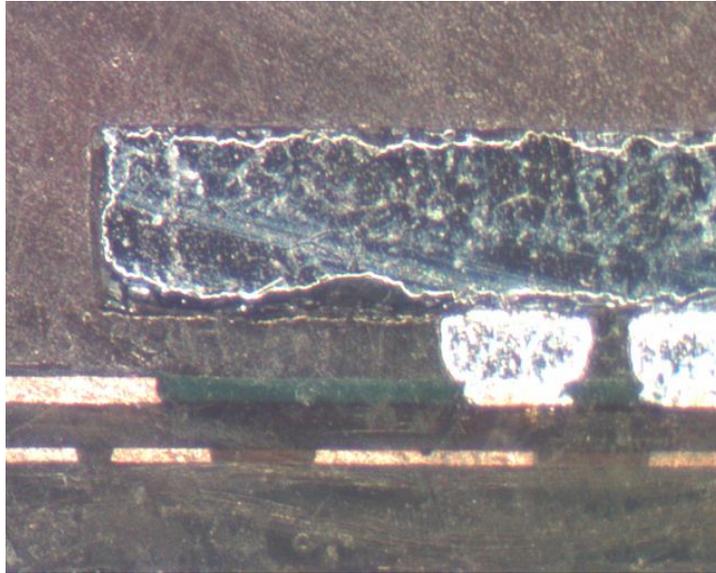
CSP Cracking on Hot Melt Test Board, 1200 Cycles
